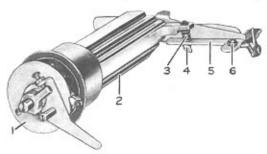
No. 11540-A Tone Arm Base Assembly (Bottom View)
